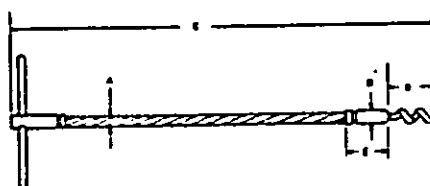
Type 1, Class 1 stuffing box and pump packing extractor, screw and flexible shaft.
